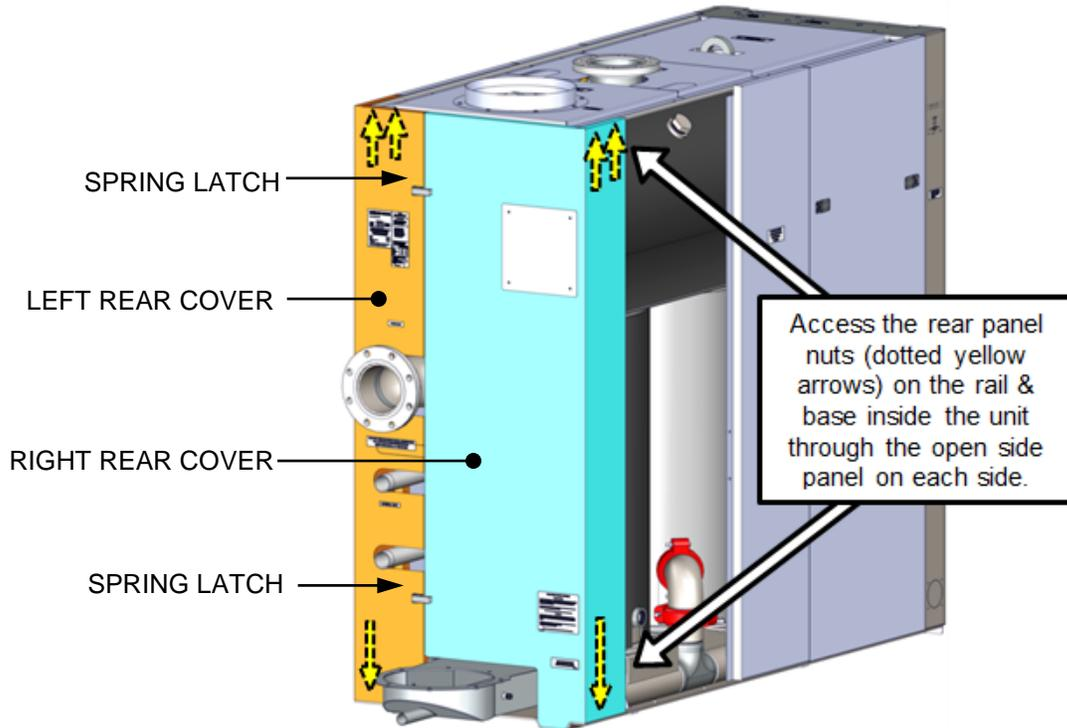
Rear View Showing Rear Panel Nut & Latch Locations
